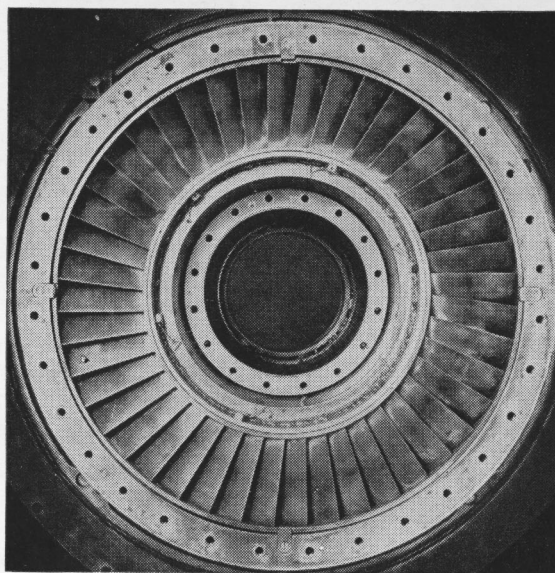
Westinghouse Yankee turbine nozzle assembly showing the lugs which hold the outer shroud ring in place and the tap bolts securing the inner shroud ring
